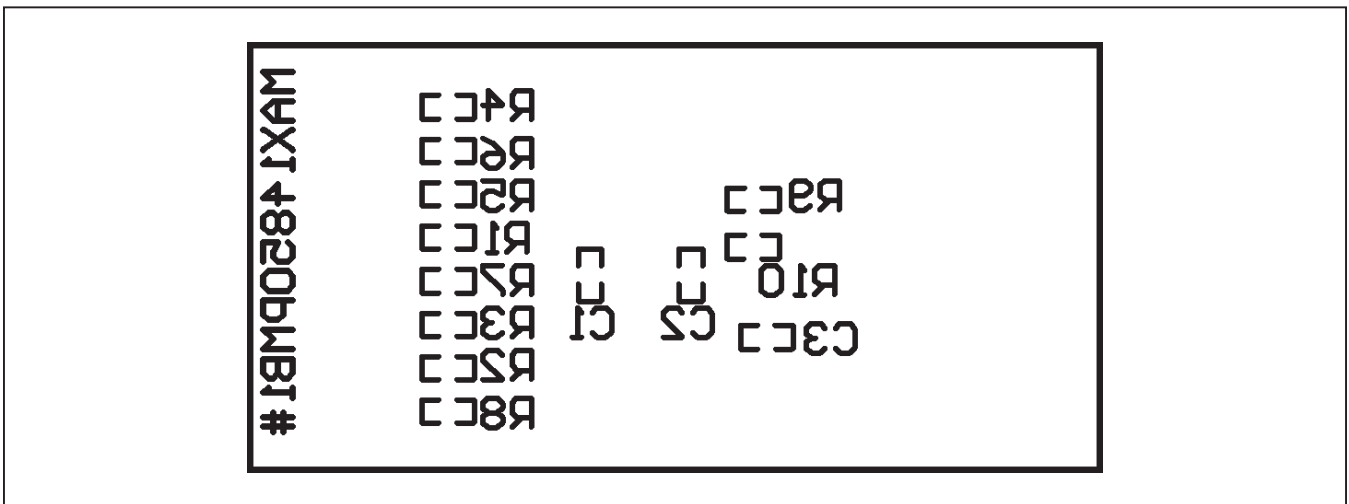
MAX14850PMB1 Peripheral Module Component Placement Guide—Solder Side
